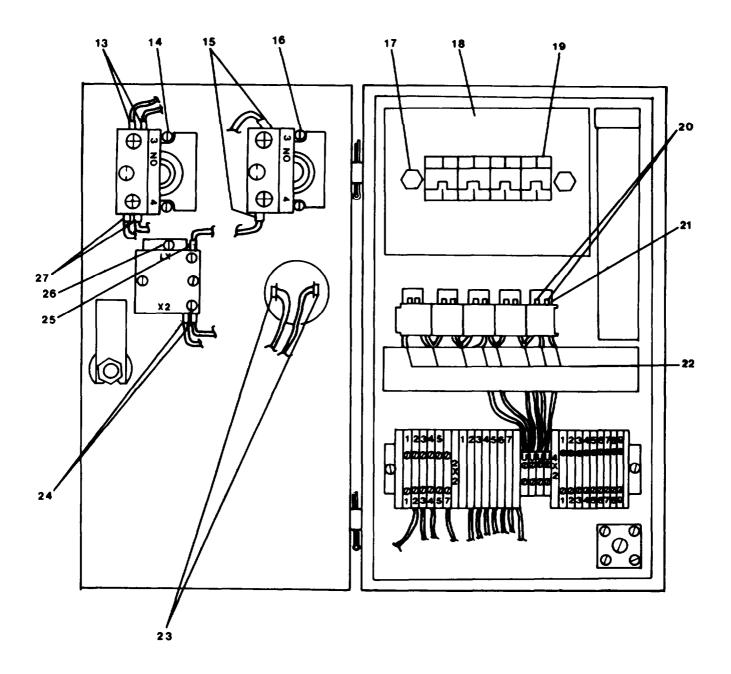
Control Unit Assembly. Bowthruster (Sheet 2 of 2).
